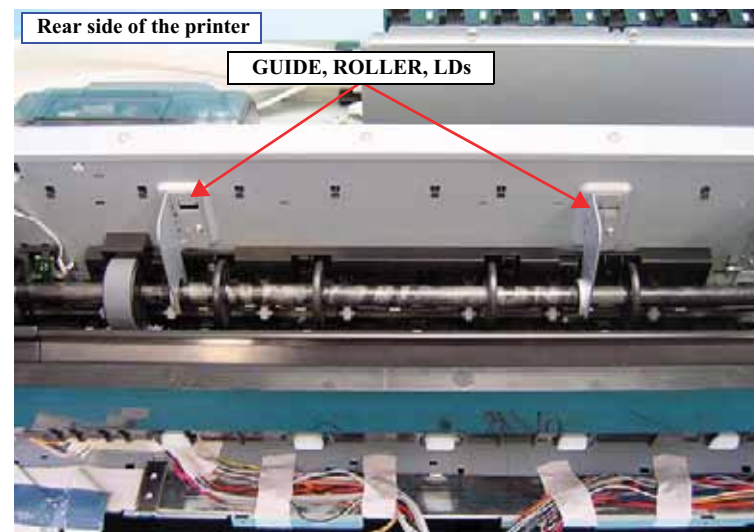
Removing the GUIDE, ROLLER, LDs
